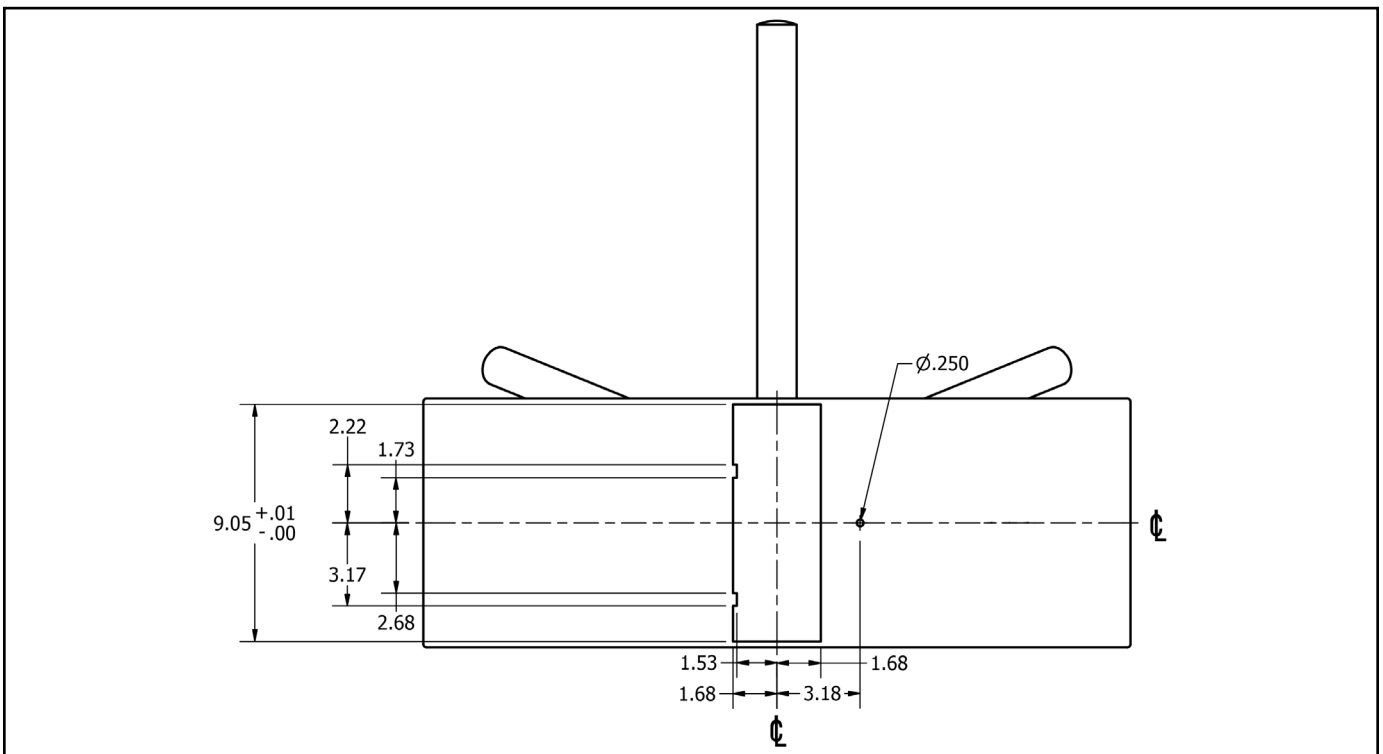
Turnstile lid cutout dimensions for mounting the SmartLog Pro® 2 using the 50189 Turnstile Mounting Kit (all dimensions are in inches)
